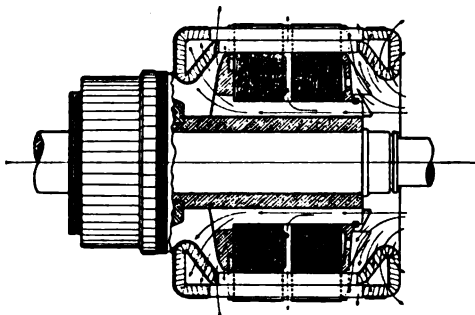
Cross-Section of Armature, Showing Method of Ventilation.
